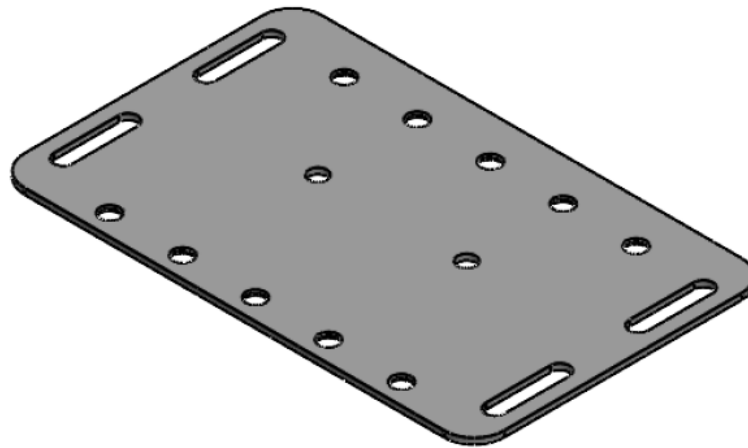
Layout Drawing of Outgoing (Consumer) Terminal Block Assembly for Single-Meterbox with Steel Enclosure
